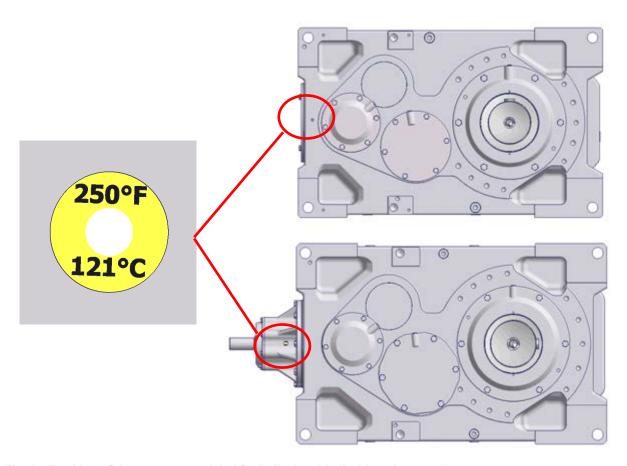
Position of the temperature label for helical and helical bevel gear units
